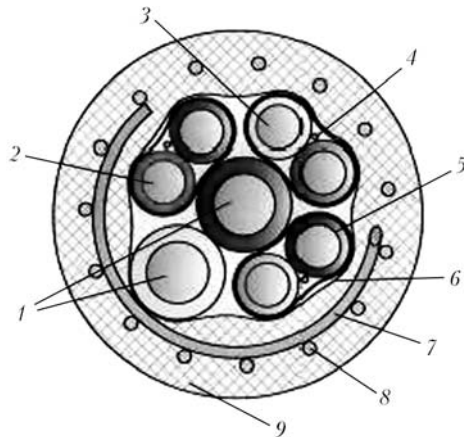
Cross-section of cable for semi-automatic underwater welding and cutting device (1–9 – see the text)
